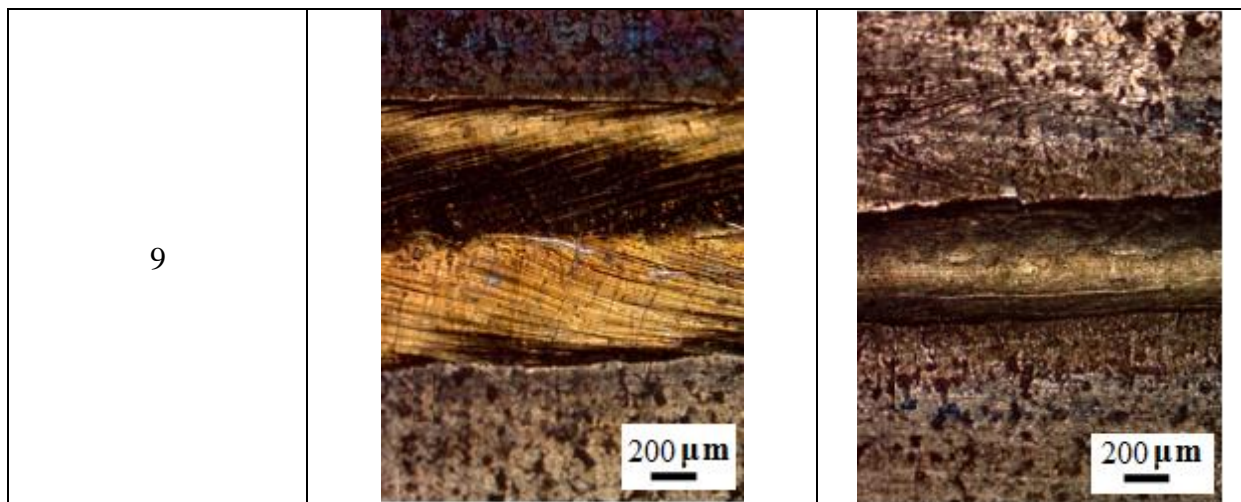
Top and bottom weld microstructures of laser welded cp-ti at different processing conditions.
